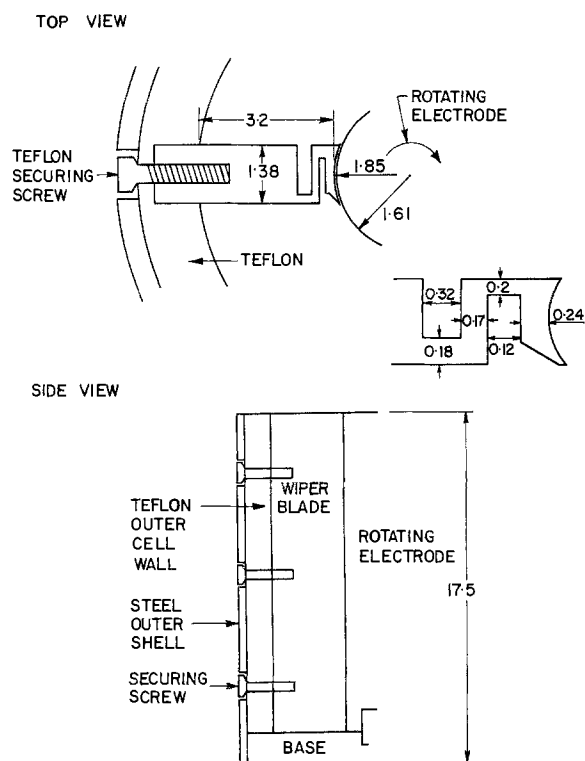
Rotating tripolar electrode cell: wiper blade design (all dimensions in cm).
